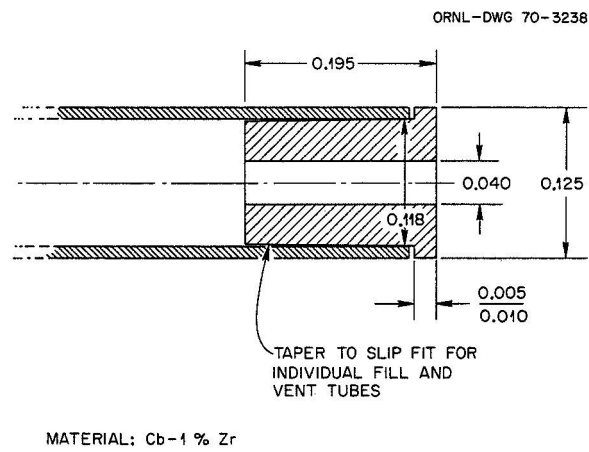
Weld Design for Plugging Ends of Fill and Vent Tubes.
